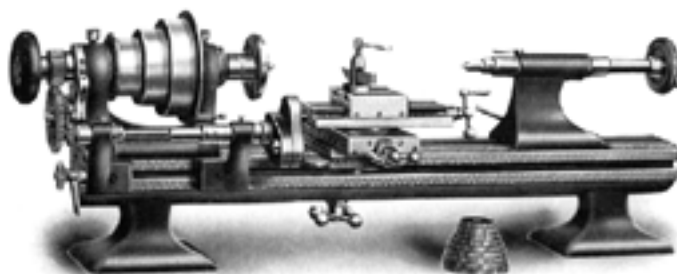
An early generation Lathe and Milling Machine (Murray, 2022)
